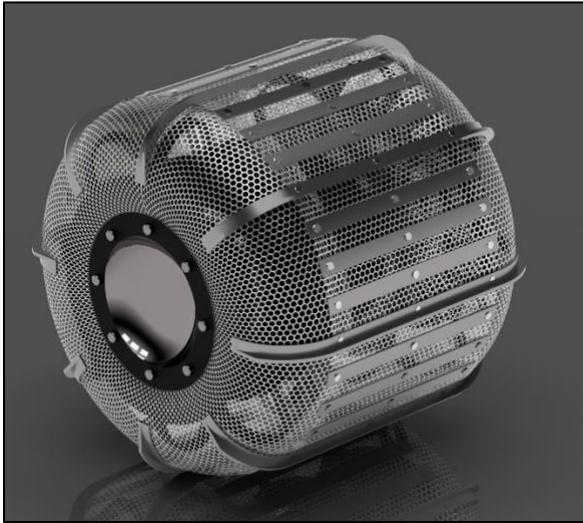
Oblique view of the double torus design wheel assembly. (Note the negative deflection bars mounted internally.)
